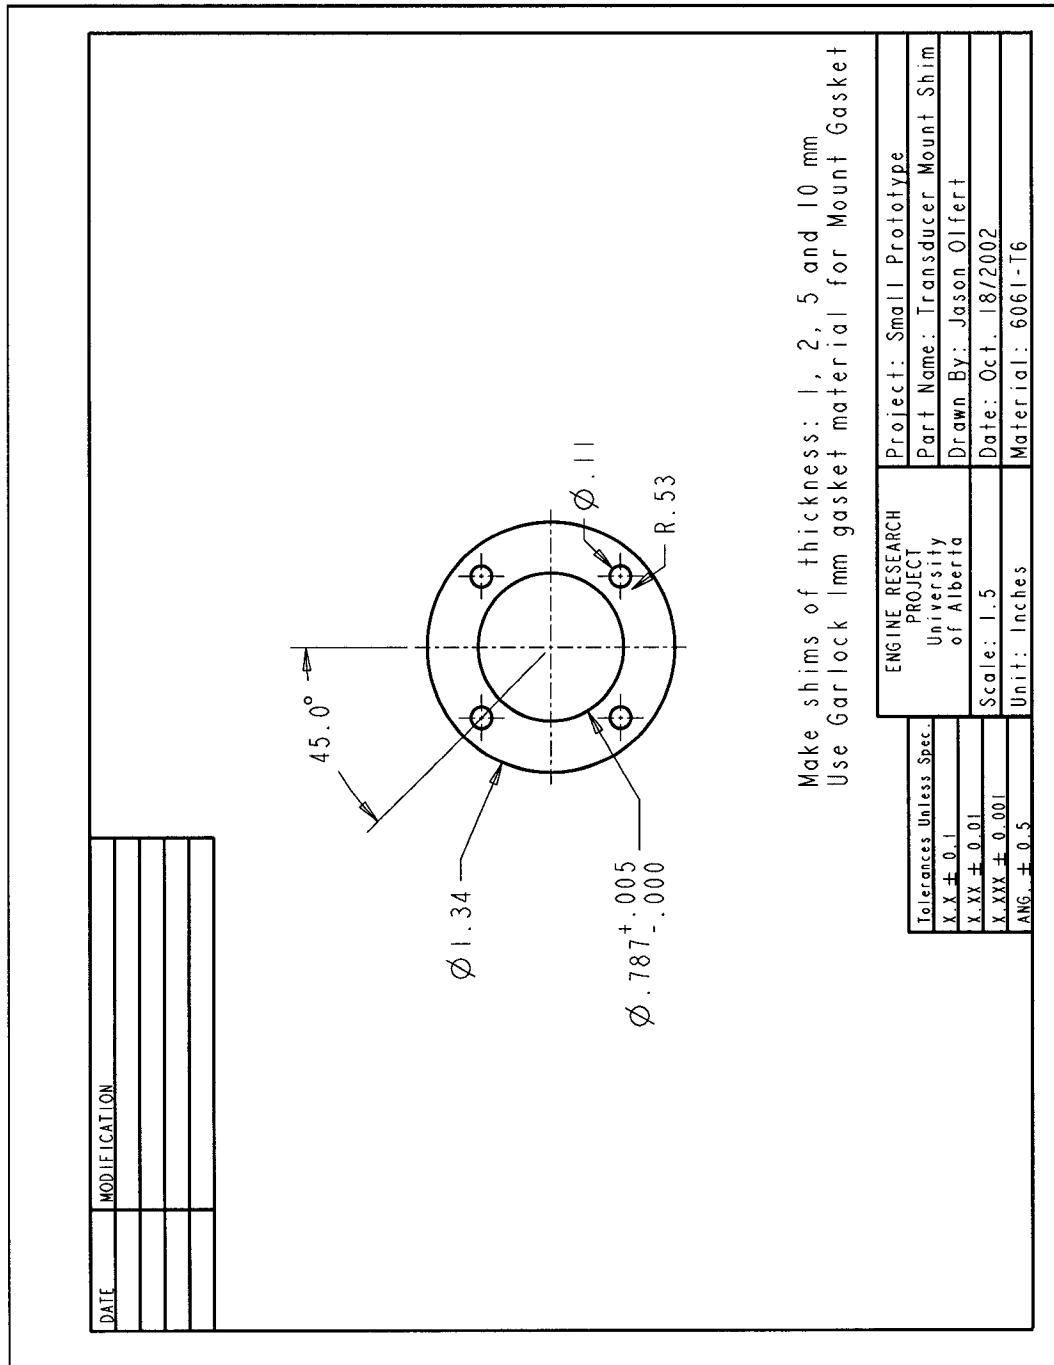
Drawing of Transducer Mount Shim of Small Prototype
